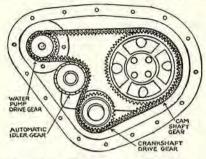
A front-end drive system used on the model "75" Haynes. An automatic take-up for slack in the chain is provided. The cam gear operates the cam shaft, which operates the inclined valves.
